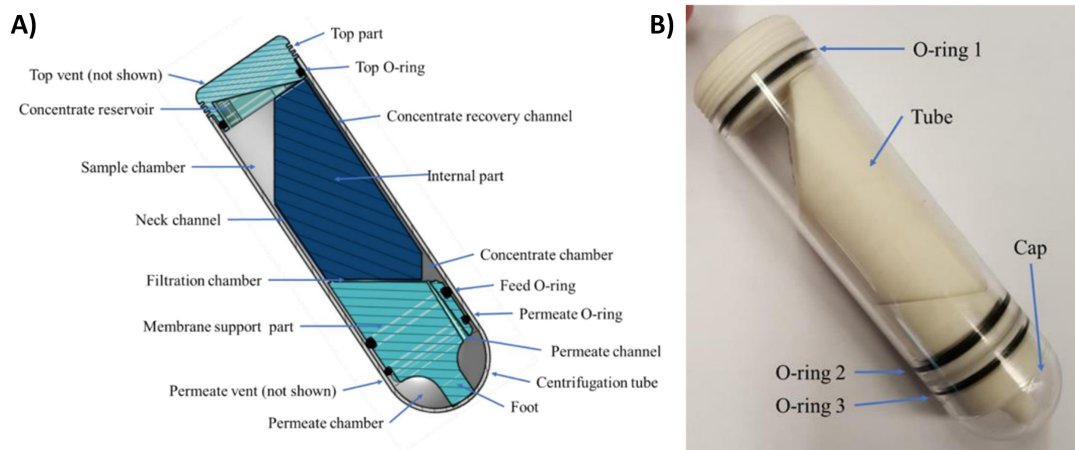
CNF device, by Hams. A) Cross-sectional schematic highlighting the internal chambers and channels. B) Assembled device. [2]
